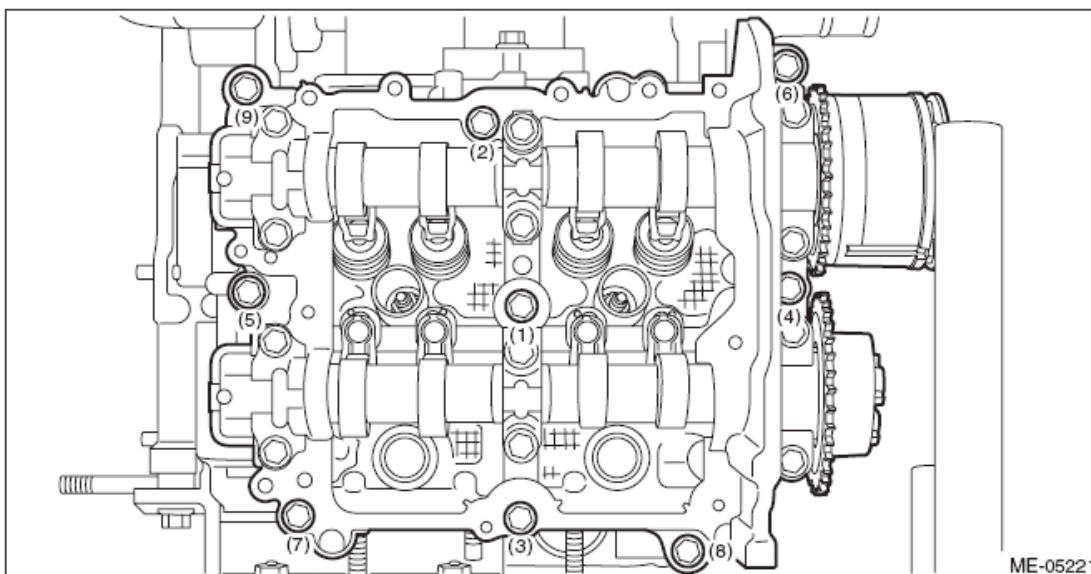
Identifying Cam Carrier Bolts Tightening Sequence
